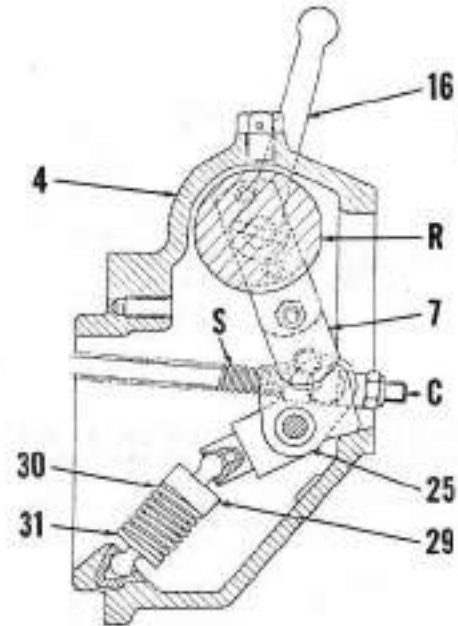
View showing trip lever (25) and overcenter spring loaded link (29, 30 & 31) installation. Refer also to Figs. 160, 161 and 162.
